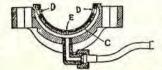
Method of oiling the main bearings on the Mitchell. The space back of the bearing forms a reservoir, the oil being forced through holes (D) and (E) under pressure.
